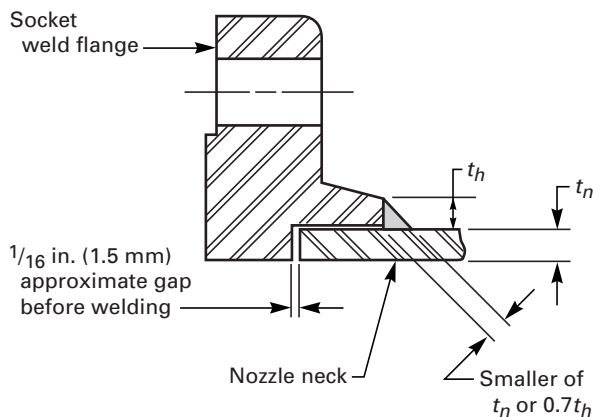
WELDS OF SOCKET WELD FLANGES TO NOZZLE NECKS
